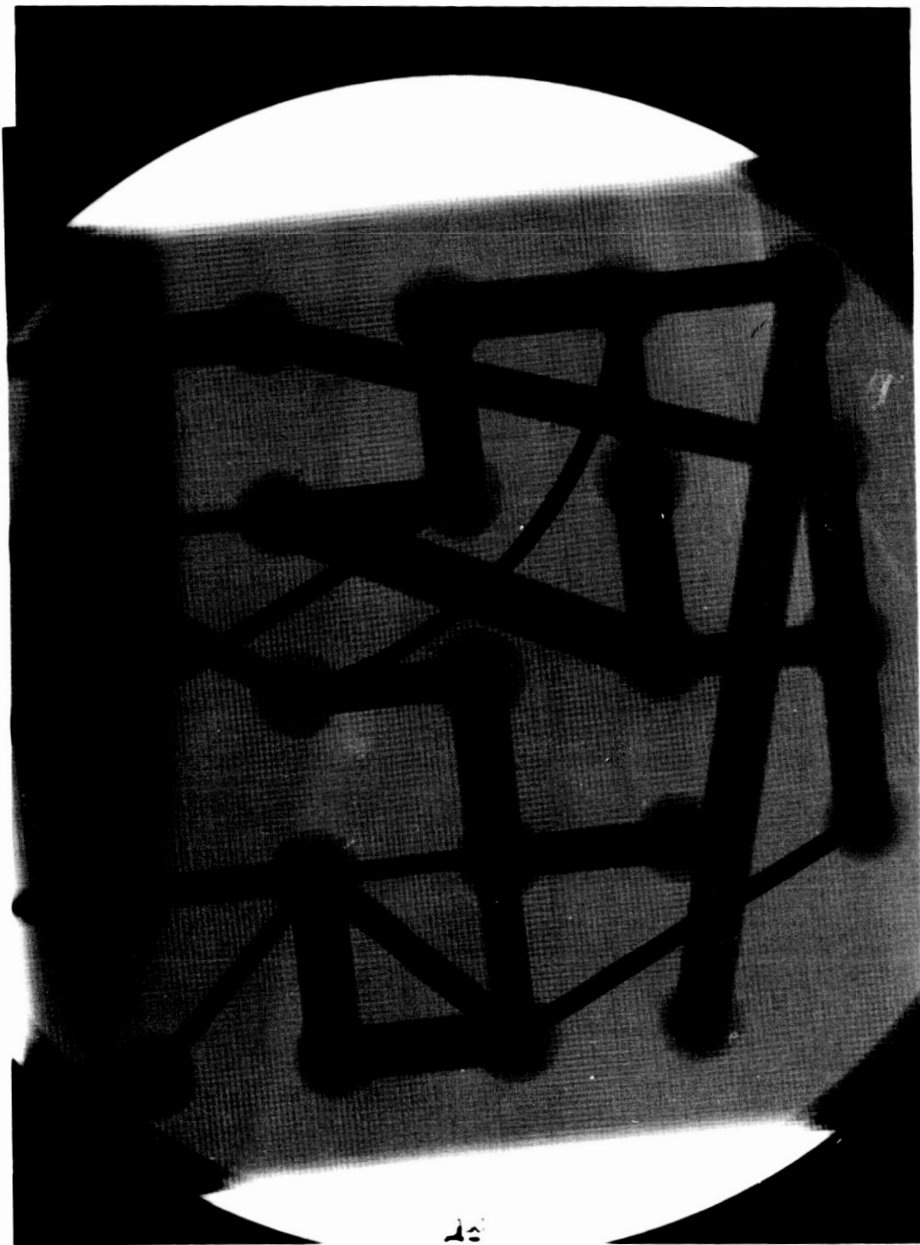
PLATE V. LAMINOGRAPH - LAYER TWO OF THE FOUR-LAYER DEFECT BOARD
